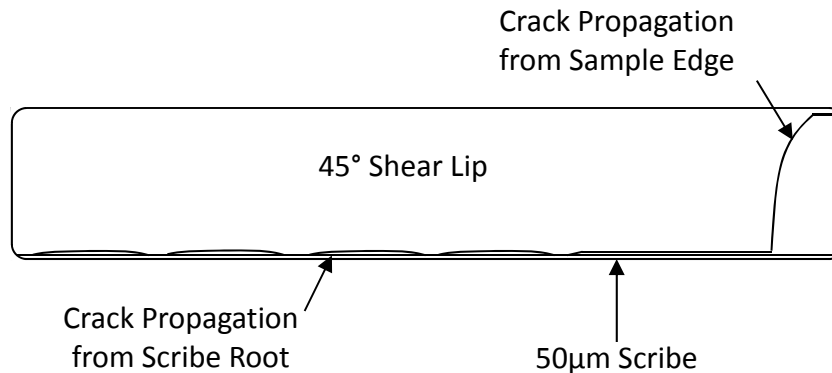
Illustration of fatigue crack development on fracture surface of 50 μm deep scribed sample with UPM peening treatment and without edge rework
